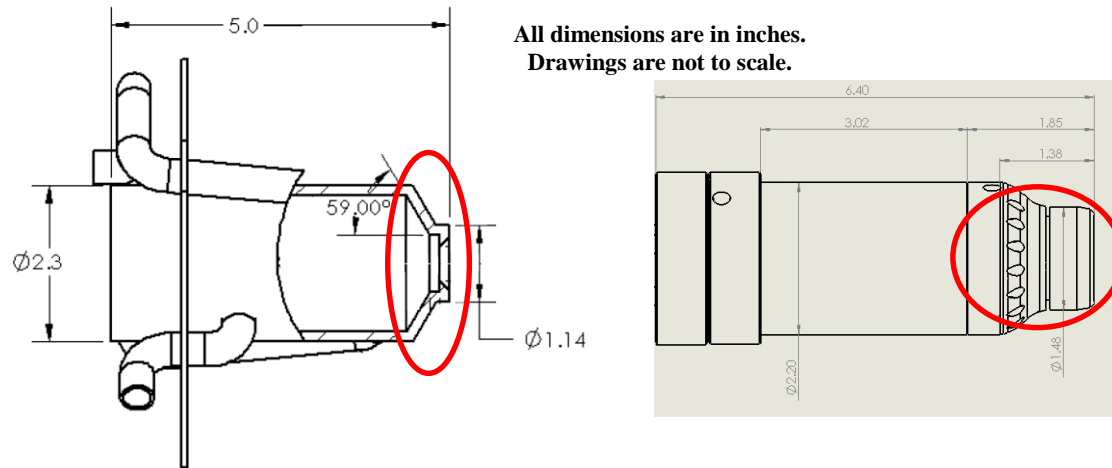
SCAARD drawing on the left and AARLITE drawing on the right illustrated the greater taper on AARLITE (5). The red ellipses highlight the nozzle tapers. All dimensions are in inches.
